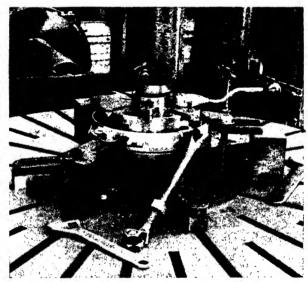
Tapping a 16-in. ring in a boring mill.
